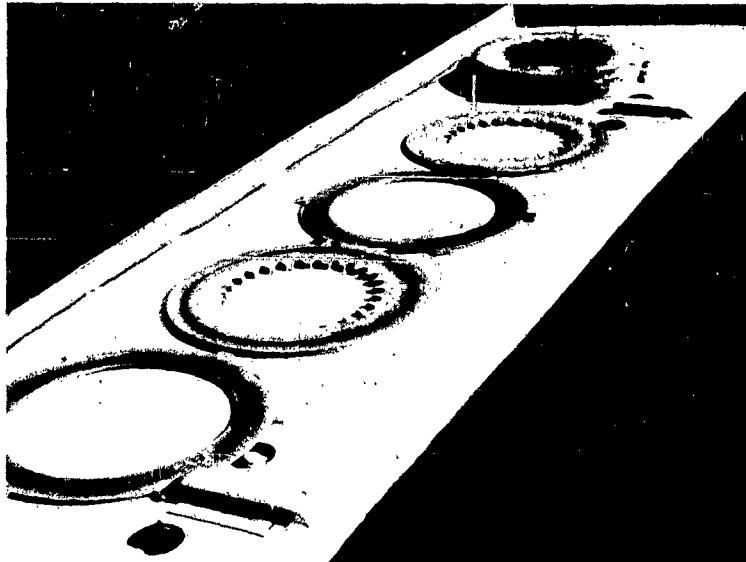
Worn steel and asbestos clutch disks removed from Trackmaster's power selector assembly.
